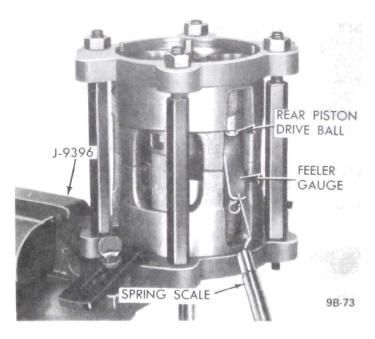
B-83 Checking Drag on Selected Feeler Gage Leaf with Spring Scale
